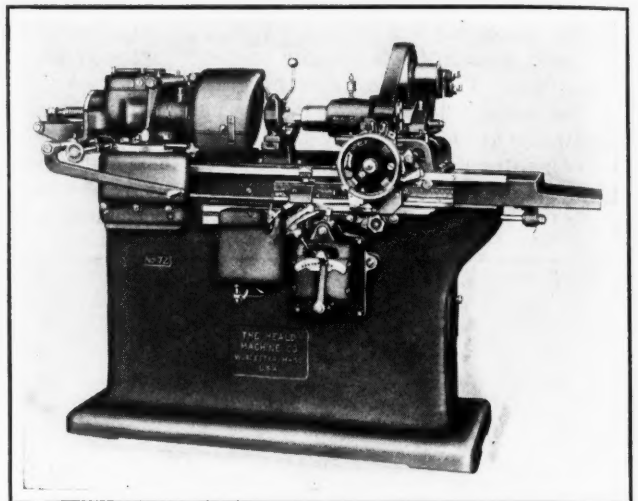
"Size-matic" Internal Grinding Machine which grinds automatically to the Finished Size
